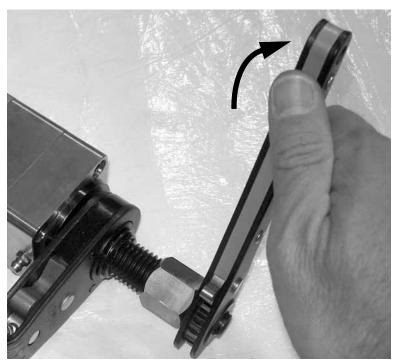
Operate the clamping lever to draw the clamp legs into the mandrel.
